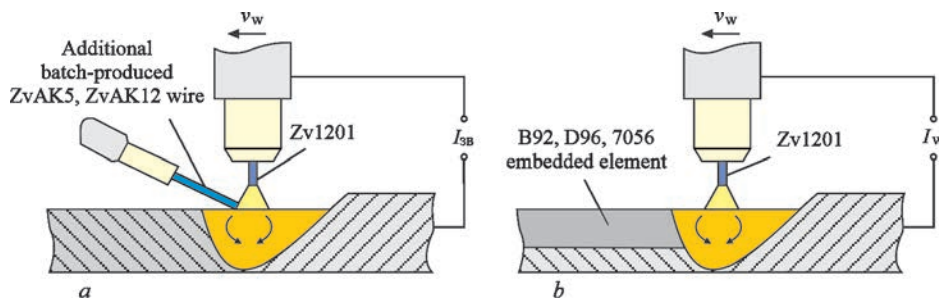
Technology variants of welding D16 alloy with two filler wires (a) and embedded elements (b) for weld metal alloying and improvement of the mechanical properties
